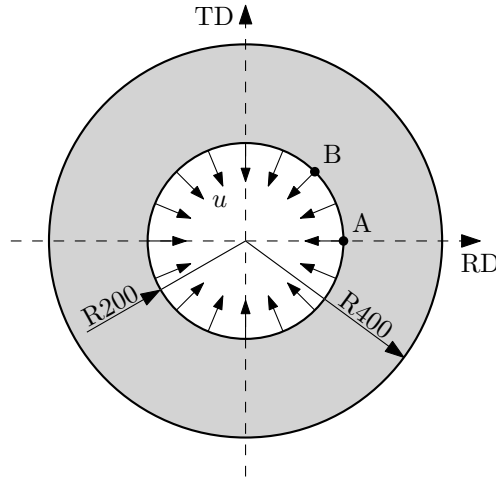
Circular flange's drawing - Scheme of the drawing process (units in mm).
